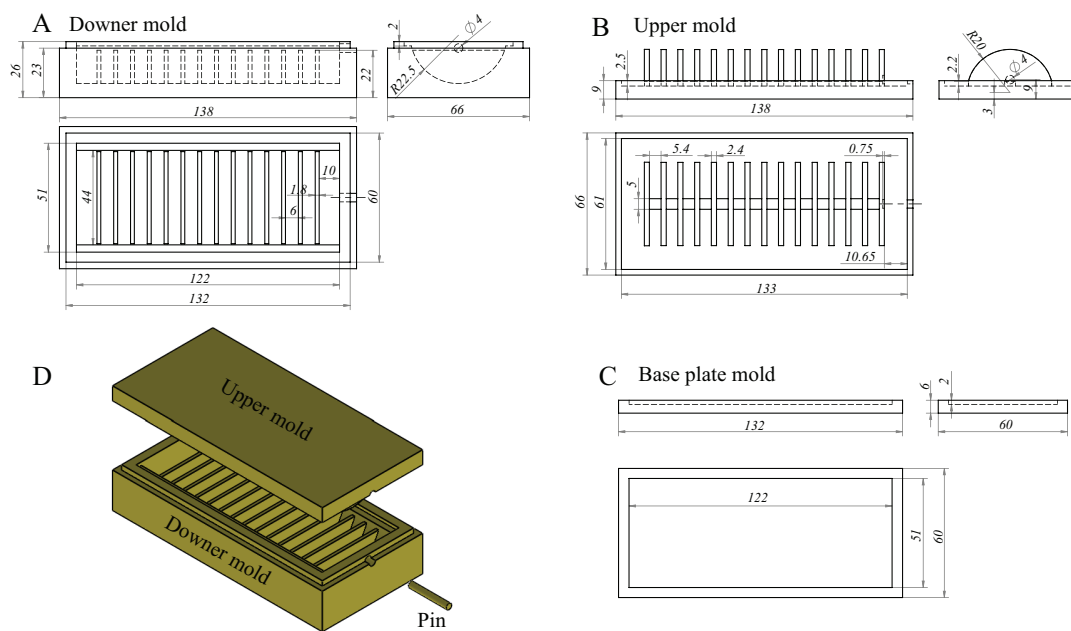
Silicone pouring molds for the soft actuator. A - Downer mold for segmented part. B - Upper mold for segmented part. C - Mold for base plate. D - Exploded view of the mold set for segmented part. Pin is used to make hole for air pipe connection.
